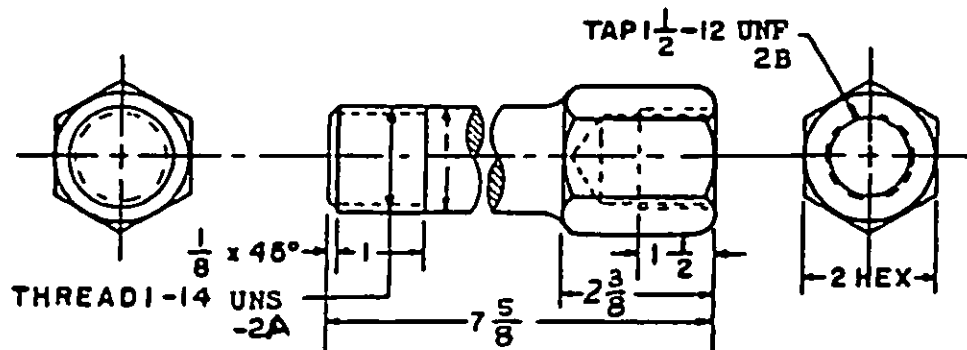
Type XIII, class 1, style C puller adapter, mechanical, gear and bearing, male and female thread with 1-1/2 - 12 UNF-2B tapped hole.
